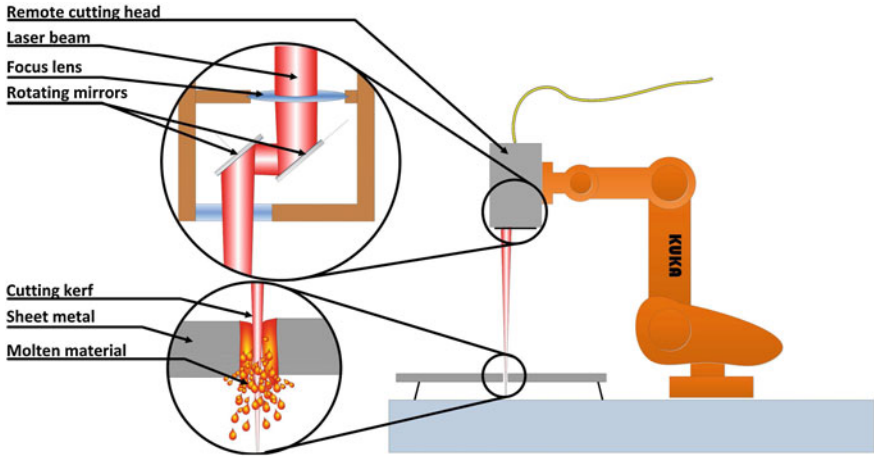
A sketch of remote laser cutting. A laser beam (red) is deflected by two mirrors and cuts a piece of sheet metal underneath. Note the remote position of the cutting head (Color figure online)
